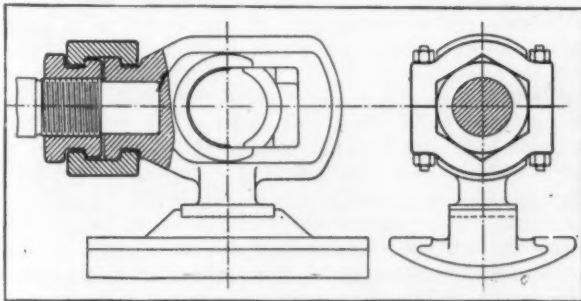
Details of the New Connecting Rod Coupling and Cross Head.
